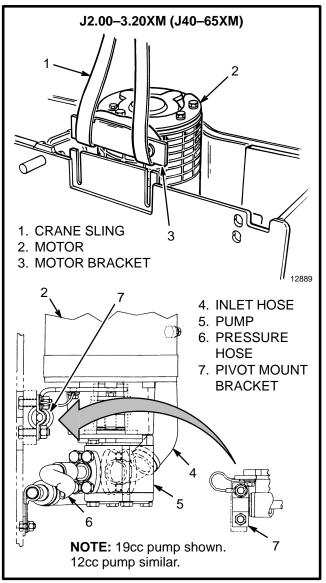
REMOVE THE J2.00–3.20XM (J40–65XM) HYDRAULIC PUMP AND MOTOR
